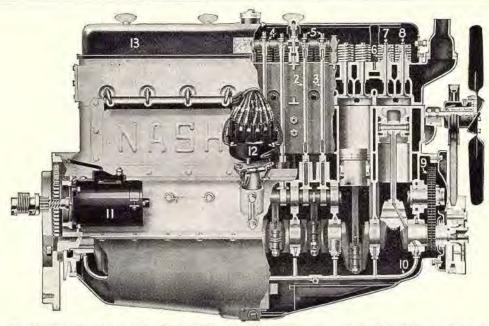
Sectional end-view of the Nash "8-80" series eight-cylinder engine with valves-in-the-head. Name of parts: 1, camshaft; 2, inlet valve push-rod; 3, exhaust valve push-rod; 4, valve-rocker; 5, valve adjusting screws; 6, valve spring (note the inner and outer spring); 7, inlet valve; 8, exhaust valve; 9, timing chain; 10, oil distributing pipe; 11, starting motor; 12, timer-distributor; 13, valve cover.
